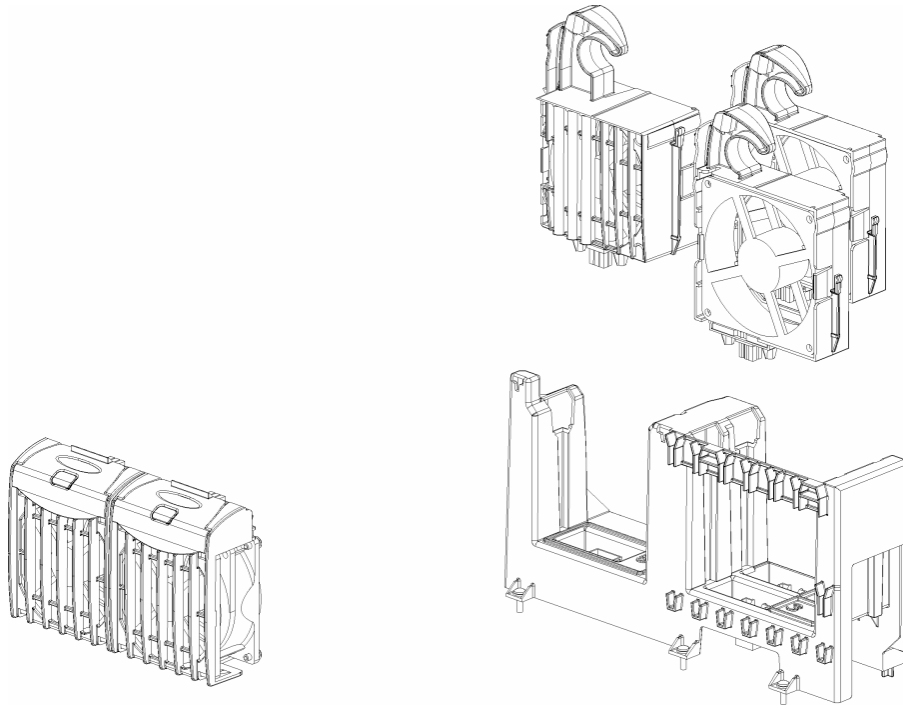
Close Up View of Redundant Hot-Swap Fan Assemblies
